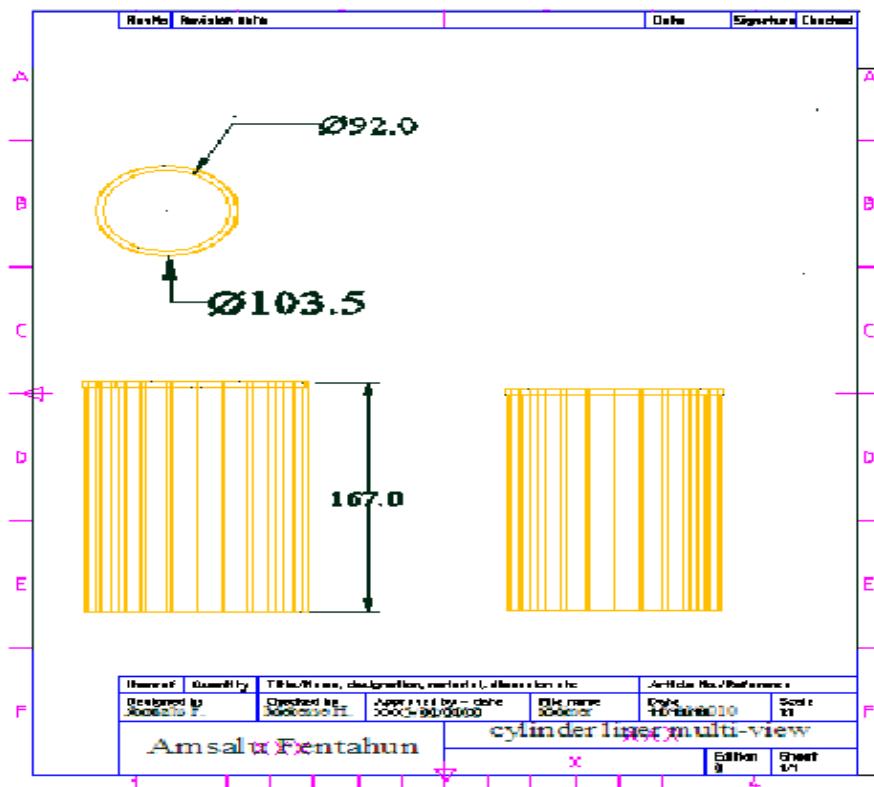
Two Dimensional Sketch of Cylinder Liner
